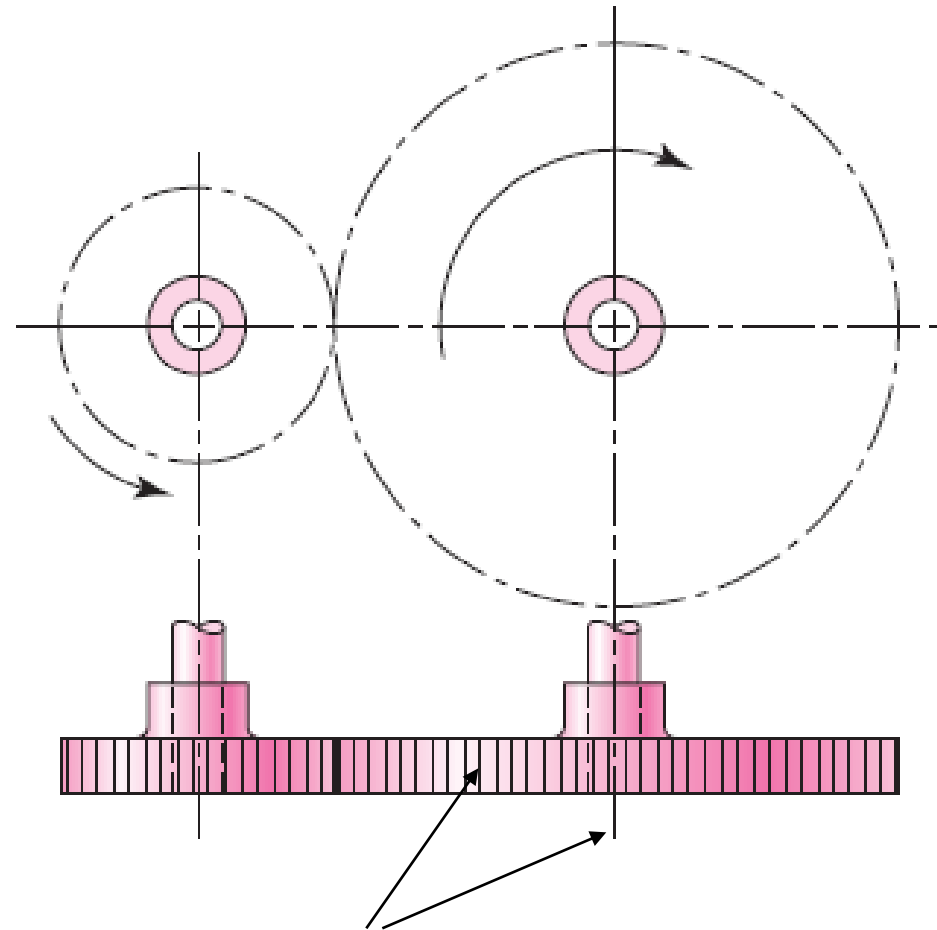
Spur gears are used to transmit rotary motion between parallel shafts
